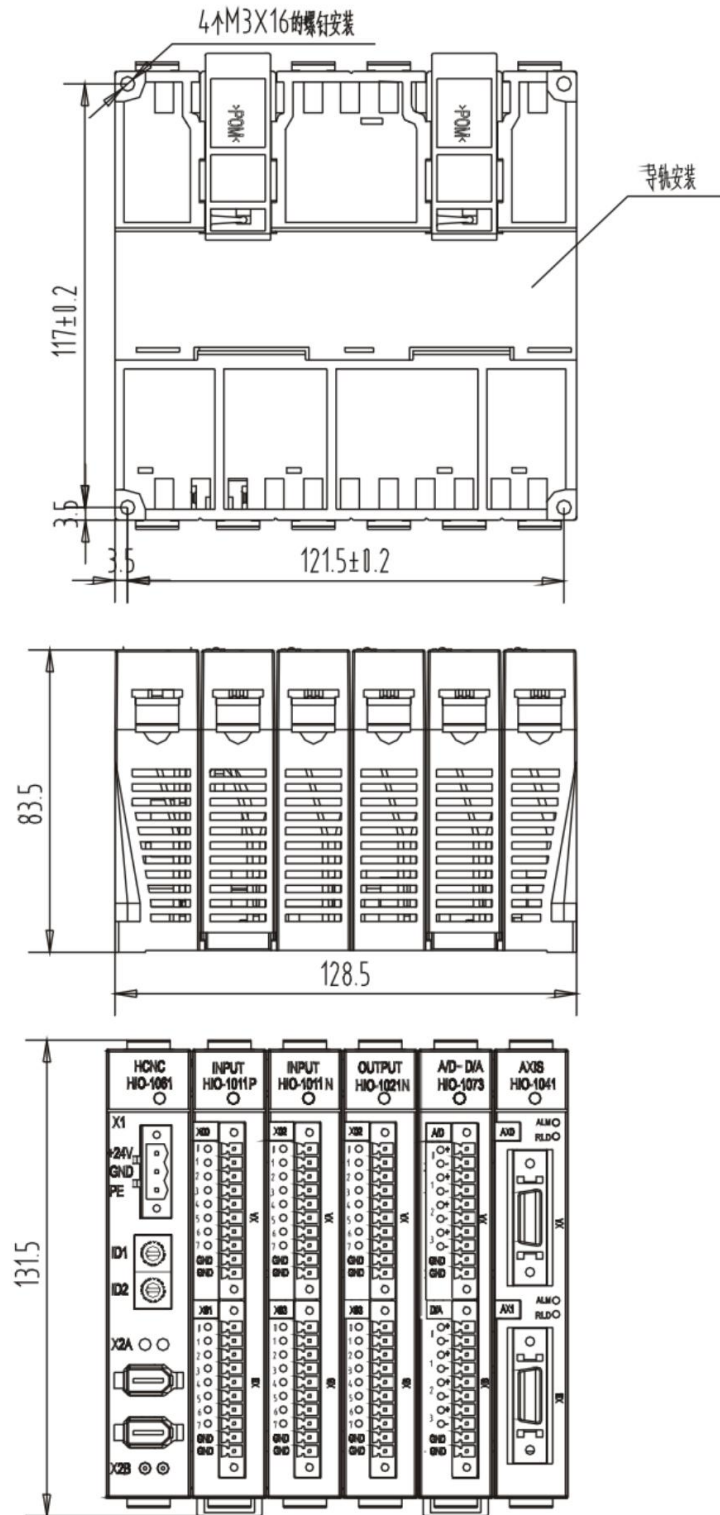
HIO-1000B Bus Type I/O Unit Dimensions
